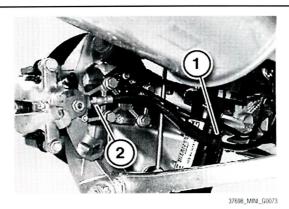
Disengage brake hose from holder (1). Detach brake hose (2) from brake caliper
